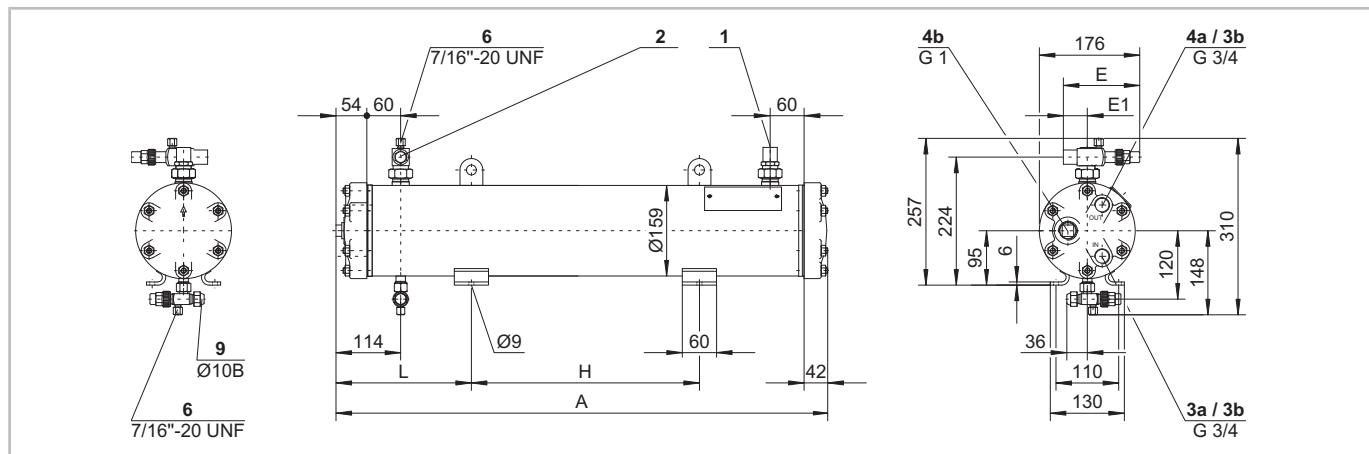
Dimensional drawings oil coolers OW401, OW 501
